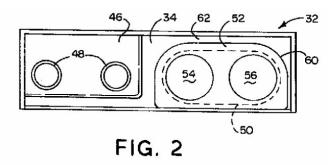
shows an optional test cap (52) that fits into a generally oblong opening (50) in the bottom wall. The test cap serves to temporarily seal this opening for pressure testing of the installation. The base of the test cap is welded to the bottom wall and two frangible knockout portions are removed to form the two juxtaposed drain ports (54) and (56).
